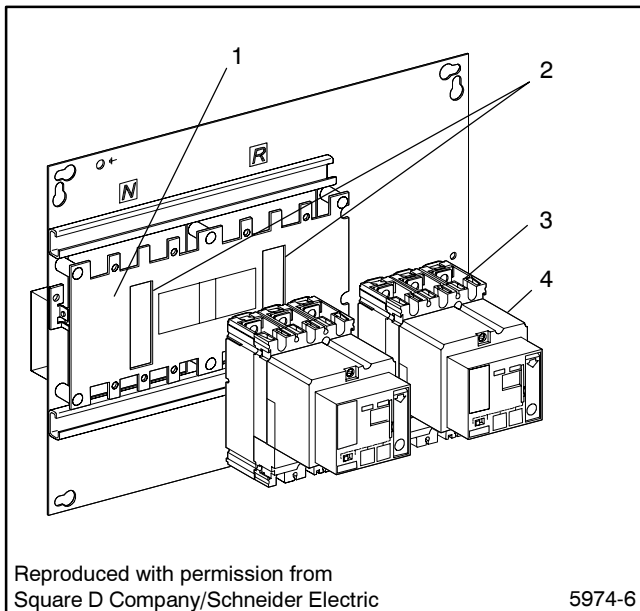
Circuit Breaker Mounting Screw Locations, 400–630 Amps
